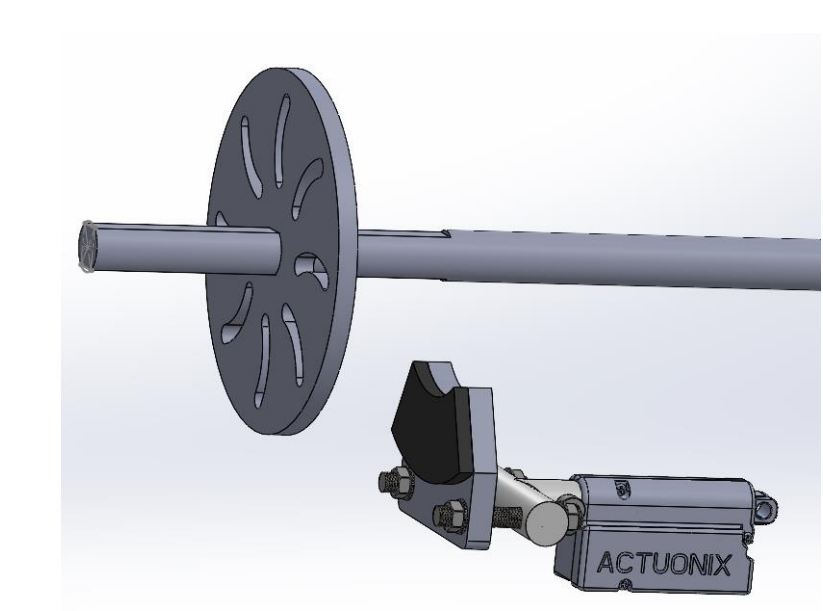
Rotor-Disc Brakes: Emergency Stop to Halt Shaft Rotation
